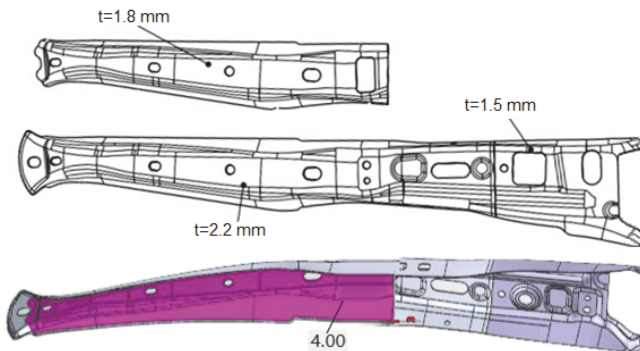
Schematic structure of B-pillar reinforcing plate splicing weld plate + patch plate
